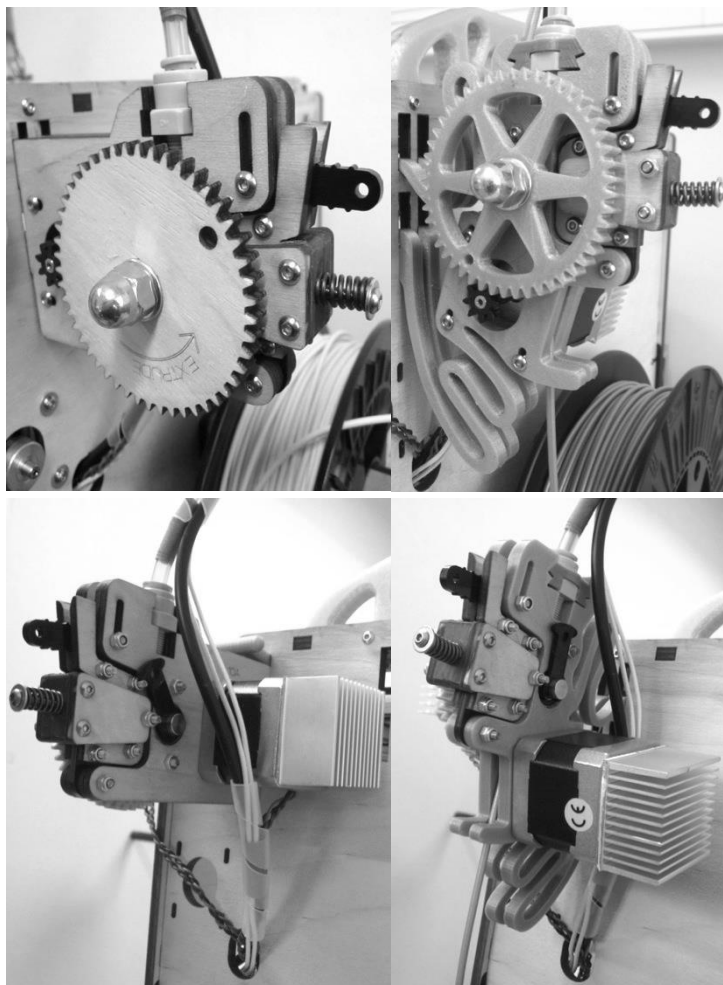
The original (left) and new (right) bowden tube clamp mechanism.
